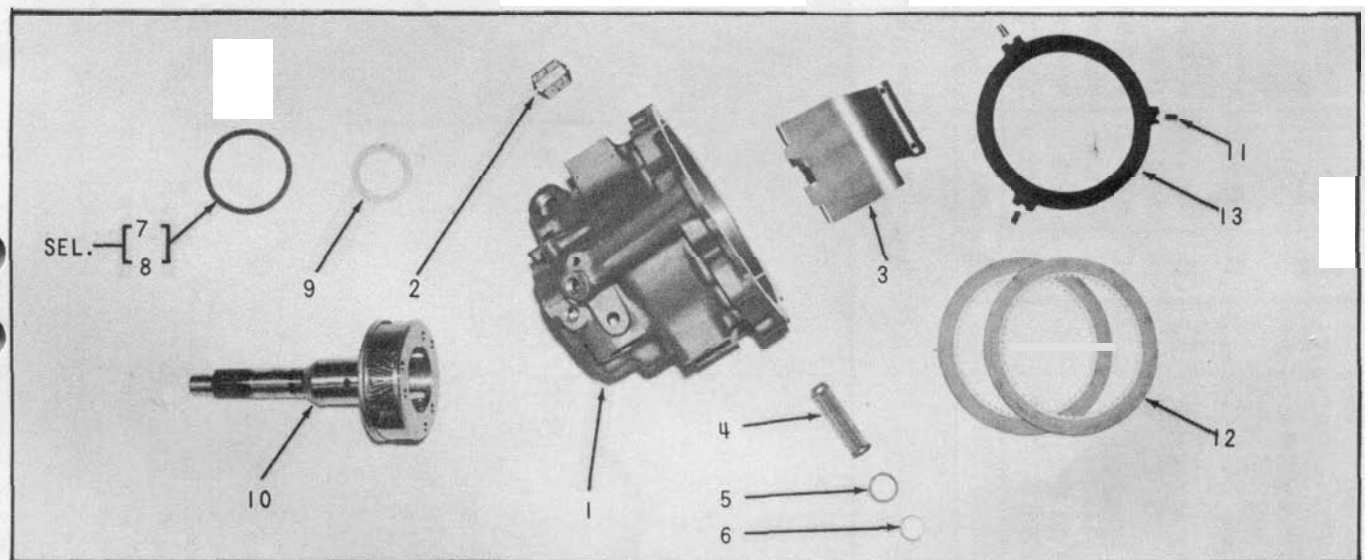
Parts Display for Forward & Reverse Section of the AS3-71C Transmission.
